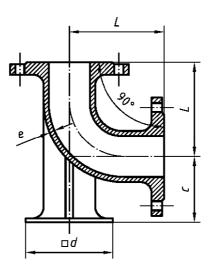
Double flanged duckfoot 90° (1/4) bends
